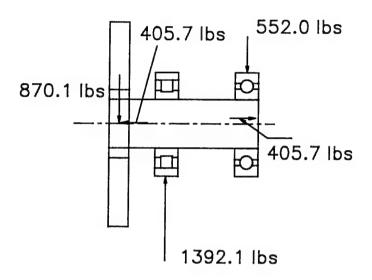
INTERMEDIATE SHAFT LOADING FOR COMBINED HELICAL EXAMPLE
